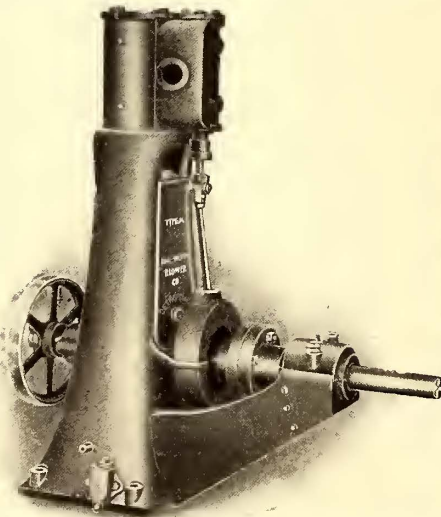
ILLUSTRATING THE CASTING OF THE JOURNAL BOXES IN THE ENGINE FRAME
